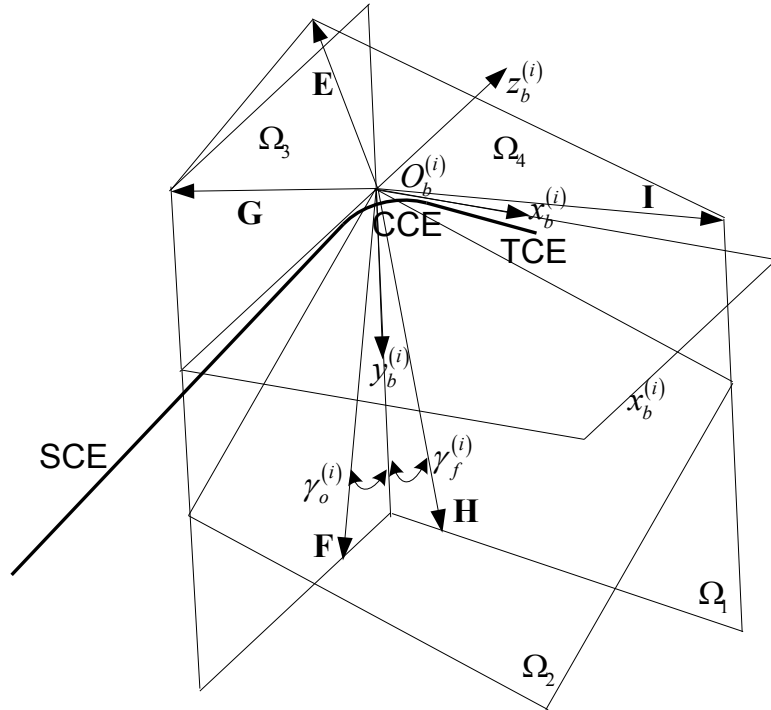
Top cutting edge and side cutting edge of inner blade.
